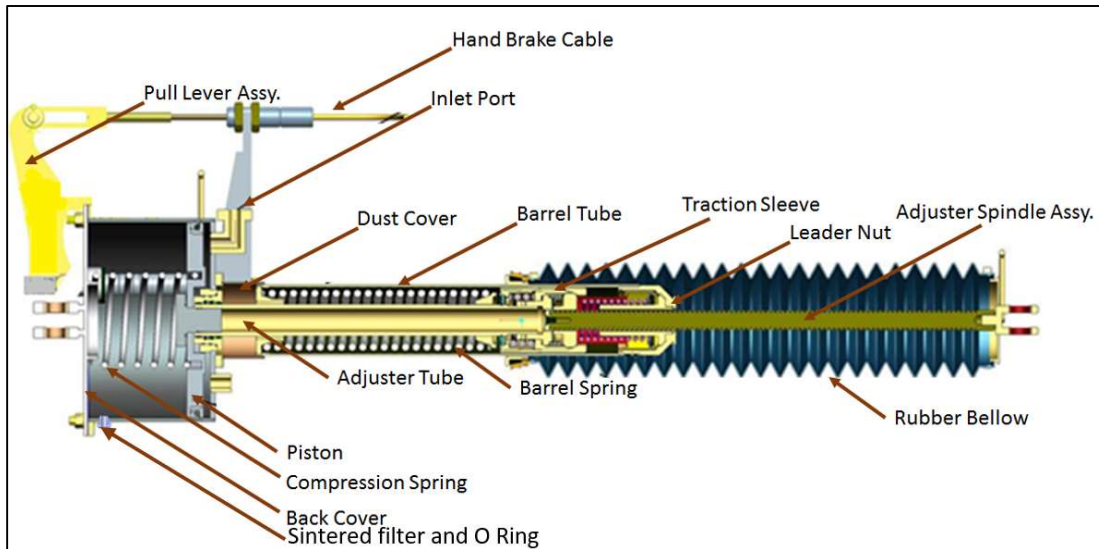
Sectional view of Brake Cylinder – 11 Inch with hand brake arrangement
